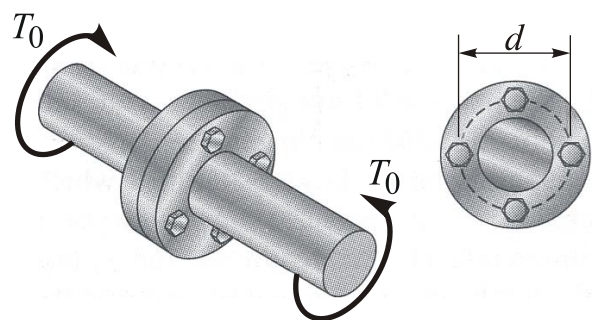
A torque T_0 is transmitted between two flanged shafts
